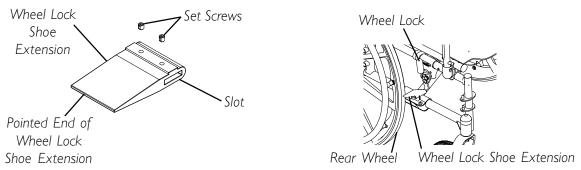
INSTALLING WHEEL LOCK SHOE EXTENSION
